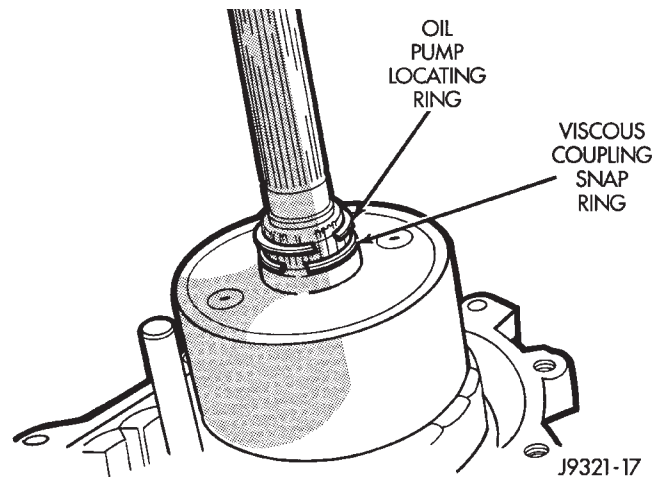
Viscous Coupling And Oil Pump Ring Installation
